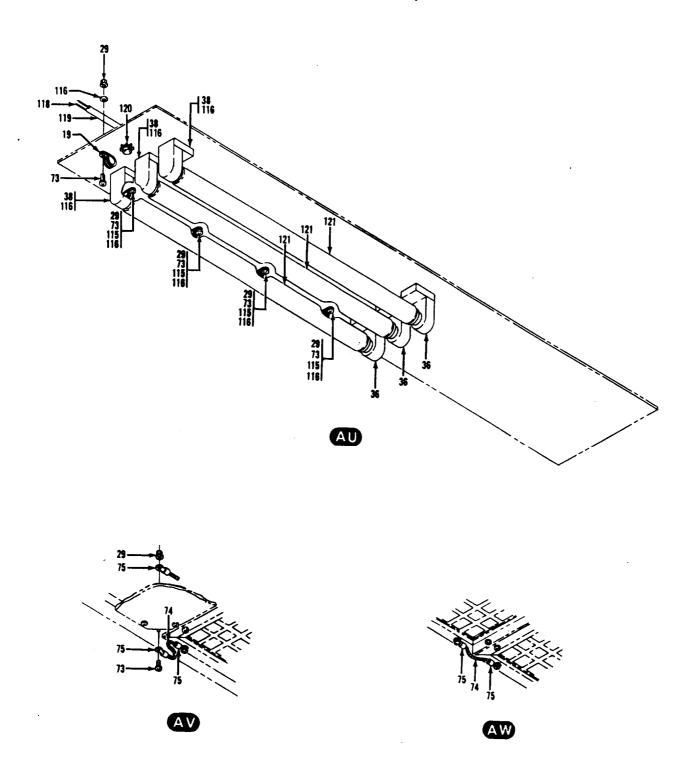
Electrical Equipment Installation (Sheet 15 of 19)
